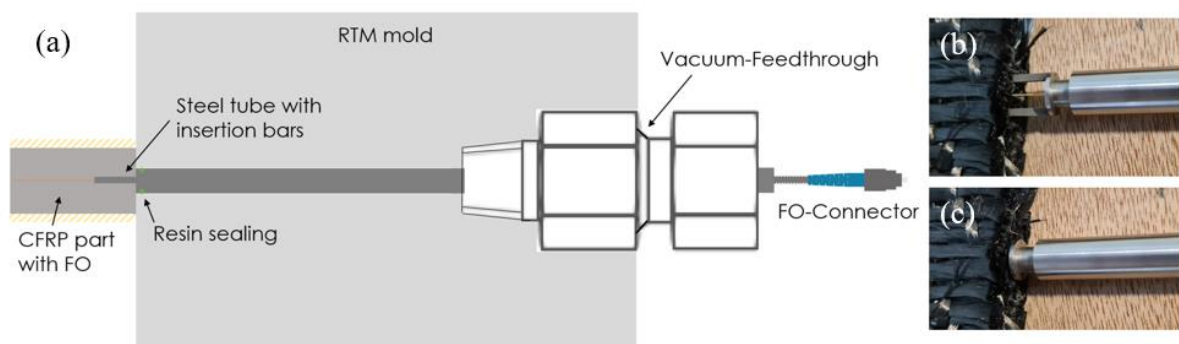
(a) Schematic cross-sectional view of the RTM mold wall showing fiber optic feed-through concept; (b) Steel tube with insertion bars in front of the CFRP part; (c) Steel tube inserted into the edge of the CFRP part.
